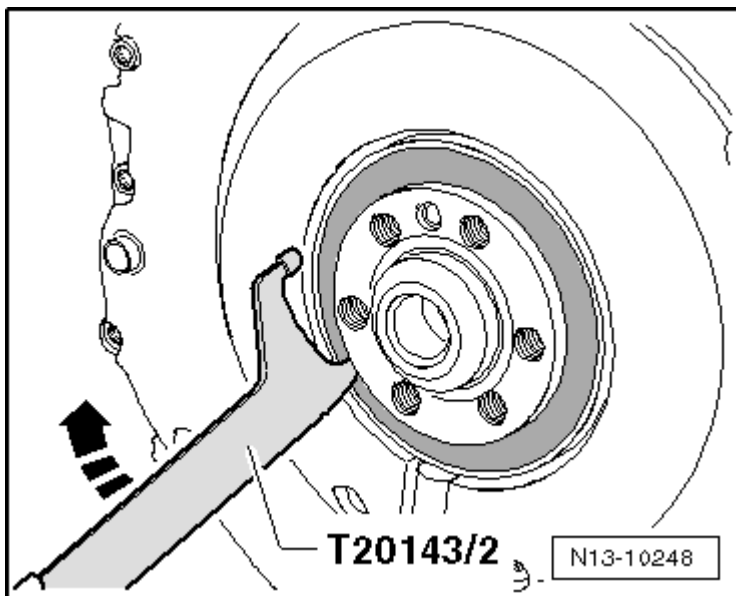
Pulling Out Sealing Ring Using Pulling Hook T20143/2
